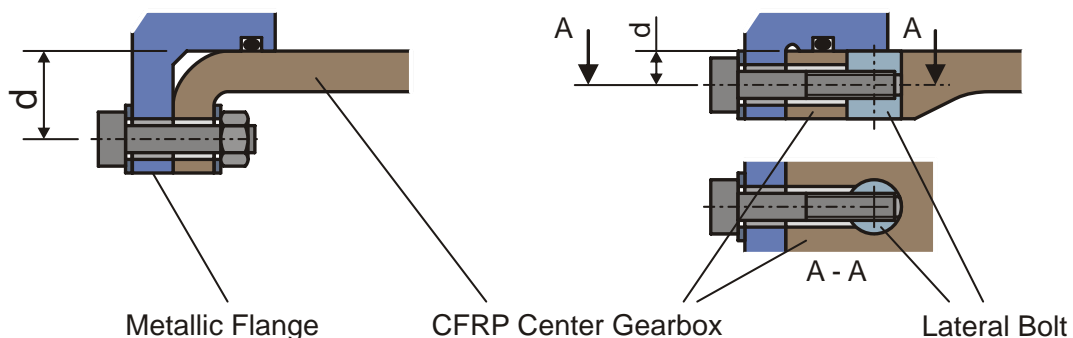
Conceptual design of the join connection between metallic flanges and CFRP center gearbox: Classic flange connection (left) and bolt connection with lateral bolts (right)
